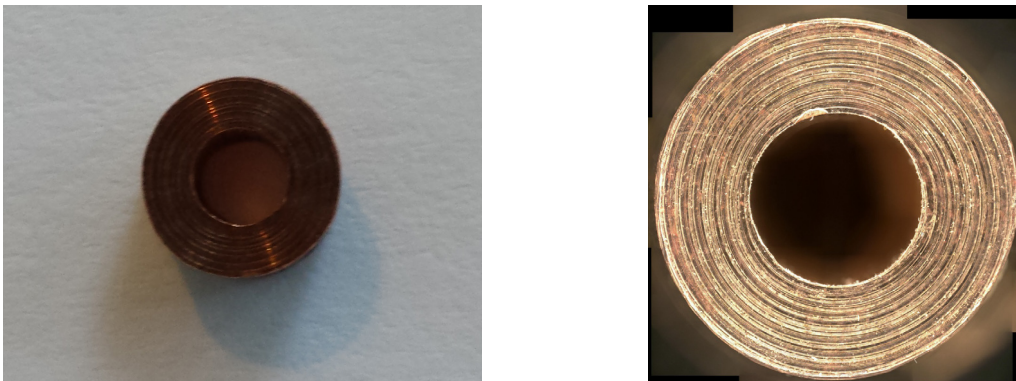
Cross section of the copper tube for the measurements of the internal diameter
